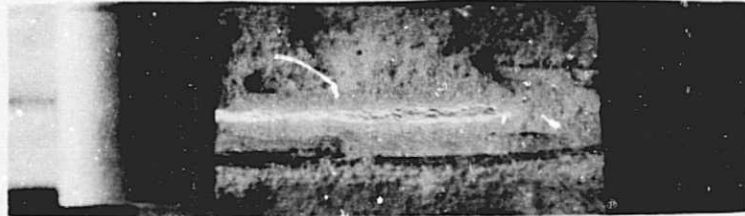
Delta scan recording and fracture surface of weld 2219-1.0-3B at IX with calibration hole trace. (4/64-inch calibration hole is elliptical indication towards bottom of page).
